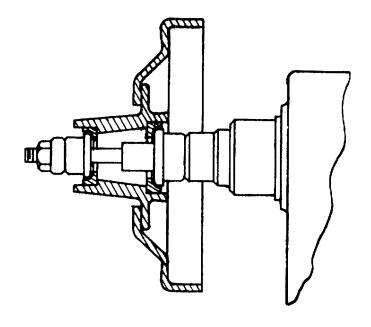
BALL BEARING EQUIPPED HUB
